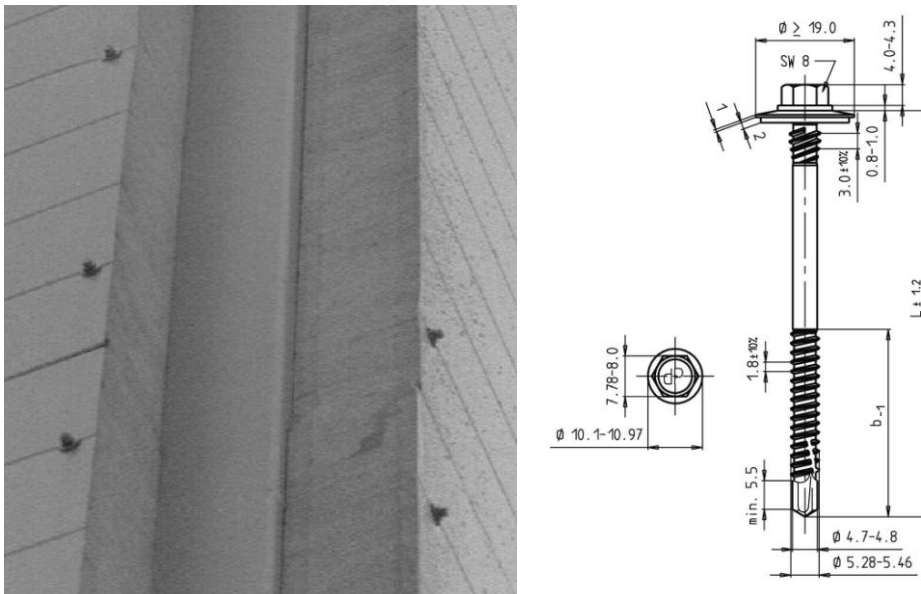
Fixings of sandwich panels: typical application and fastener (right hand Figure courtesy of Würth).
